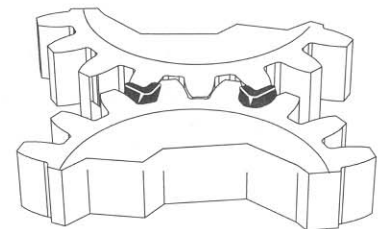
Letting the gears roll back onto the second chock. The gears will now be locked in place.
